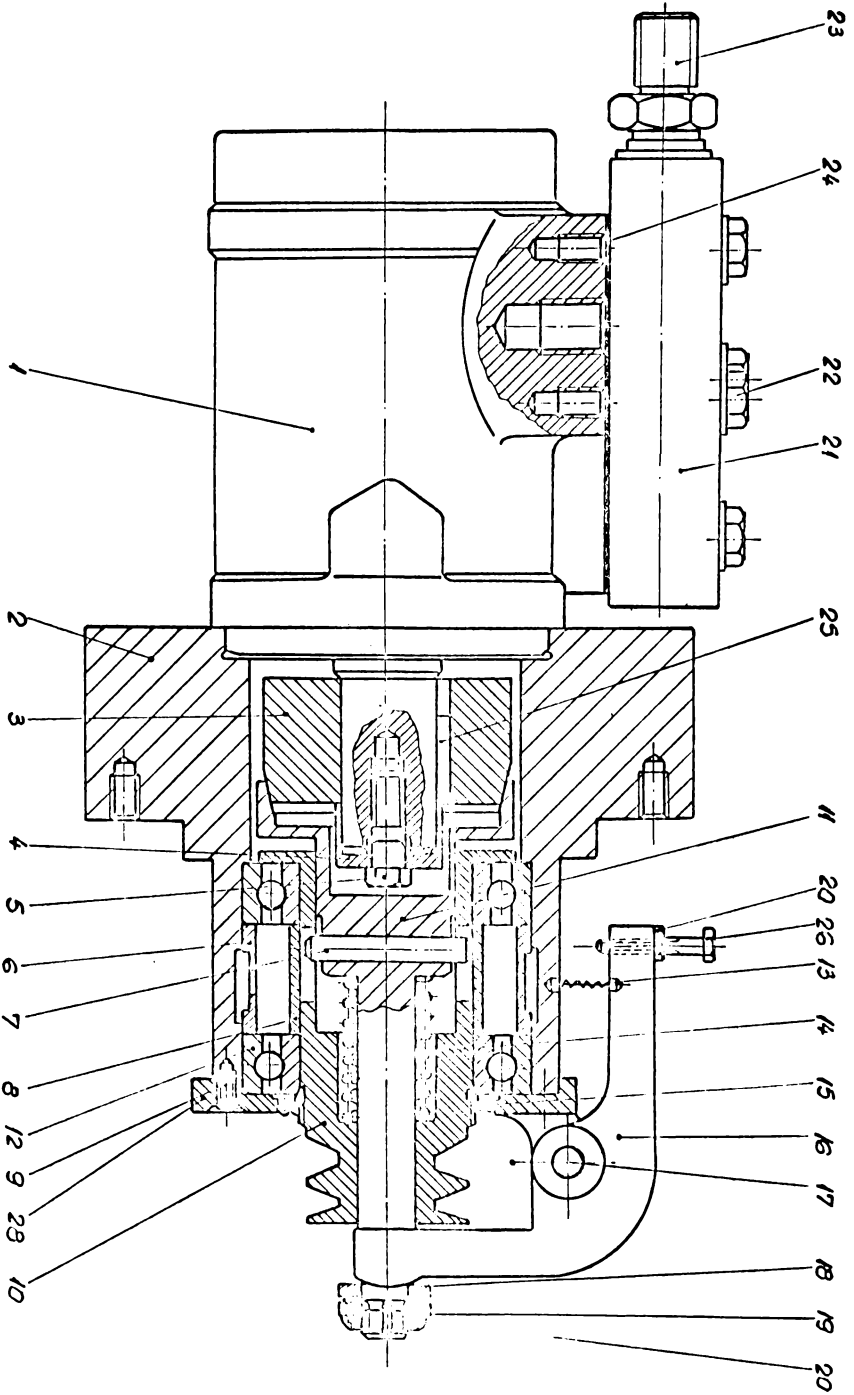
Cross-section of the main body of the machine with the main body of the machine.
